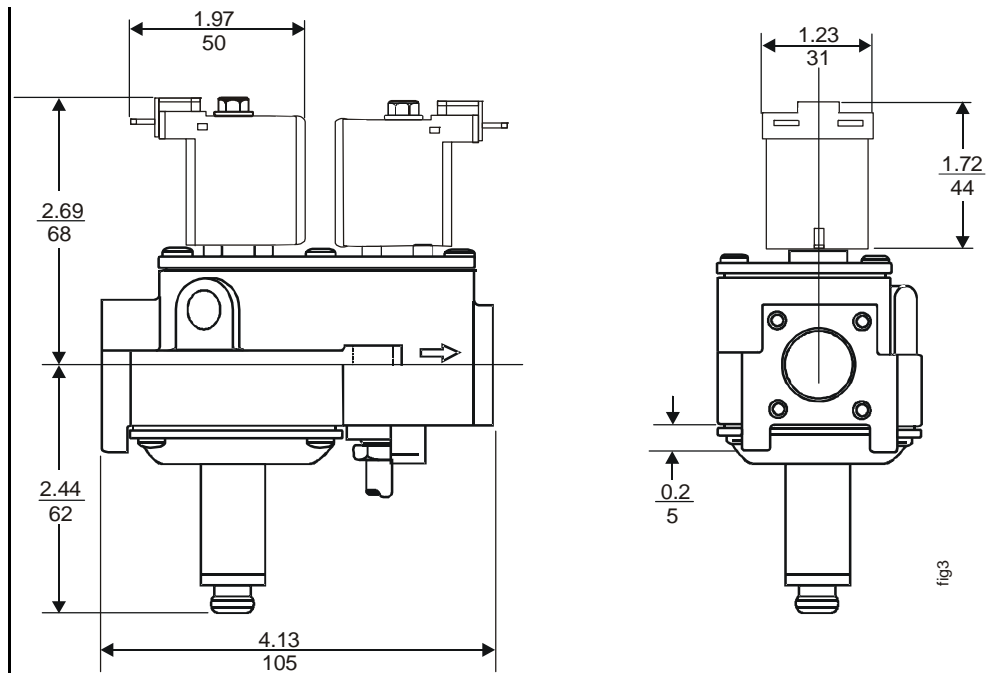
Valve with Direct-Acting Pressure Regulator and 2-pin, 24 VAC, 9.5 VA Coils, in. (mm)
